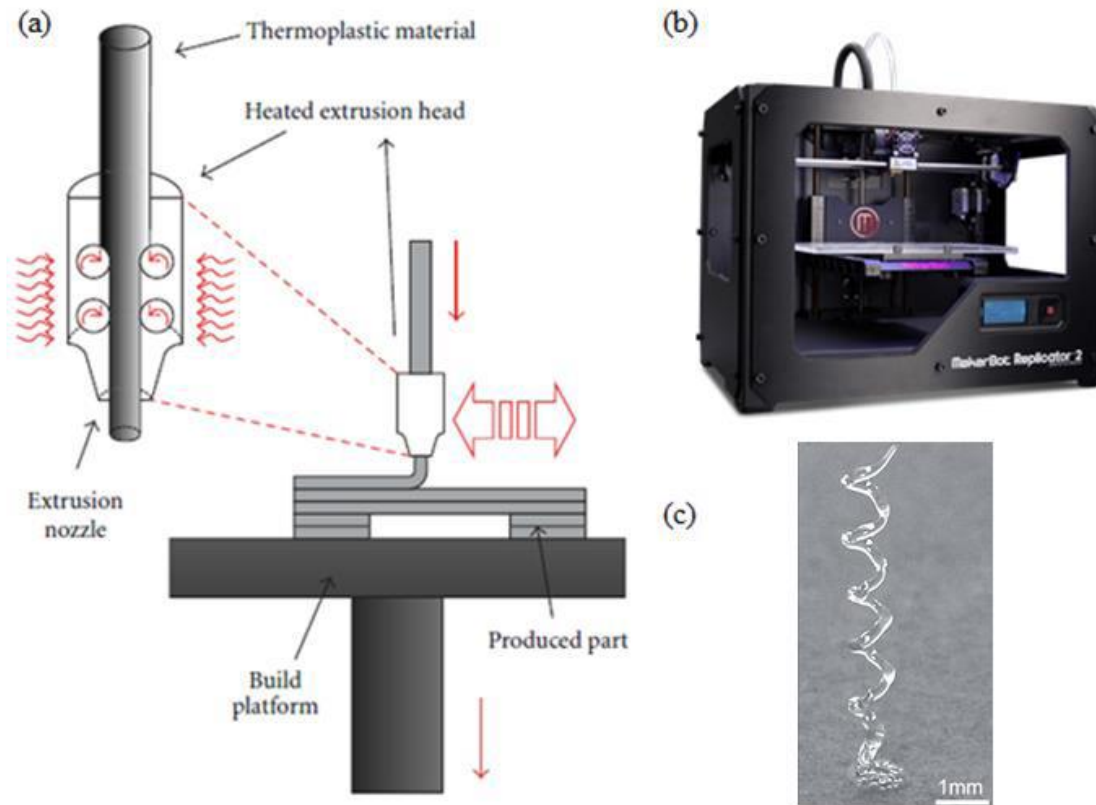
FDM fabrication technique (a) schematic of a typical setup consist of a liquefier chamber, an extrusion nozzle and a build platform [103], (b) a commercial FDM printer: MakerBot Replicator [104], (c) optical image of a helical microstructure having 5 turns with a pitch of 0.8 mm and filament diameter of 0.2 mm fabricated using thermoplastic PLGA. [105]
